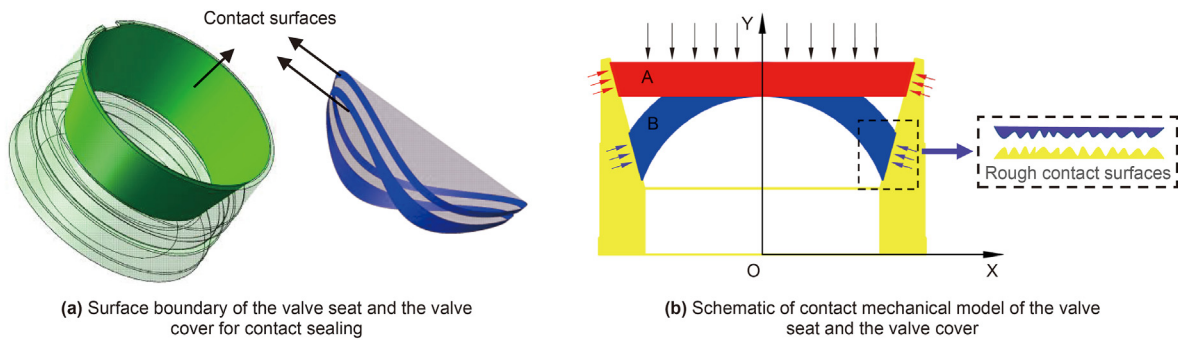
Physical model of the sealing interfaces of pressure controller.
